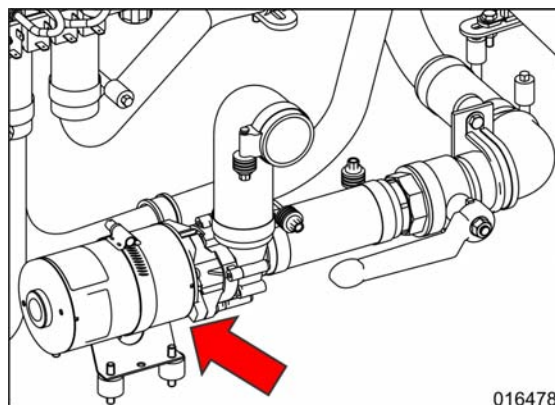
Location of FT5000 coolant circulating pump (Combustion heater not drawn for clarification purposes)
